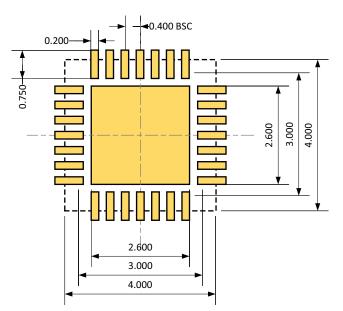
Recommended board layout for QFN 28-pin 4x4mm (all dimension in mm)
